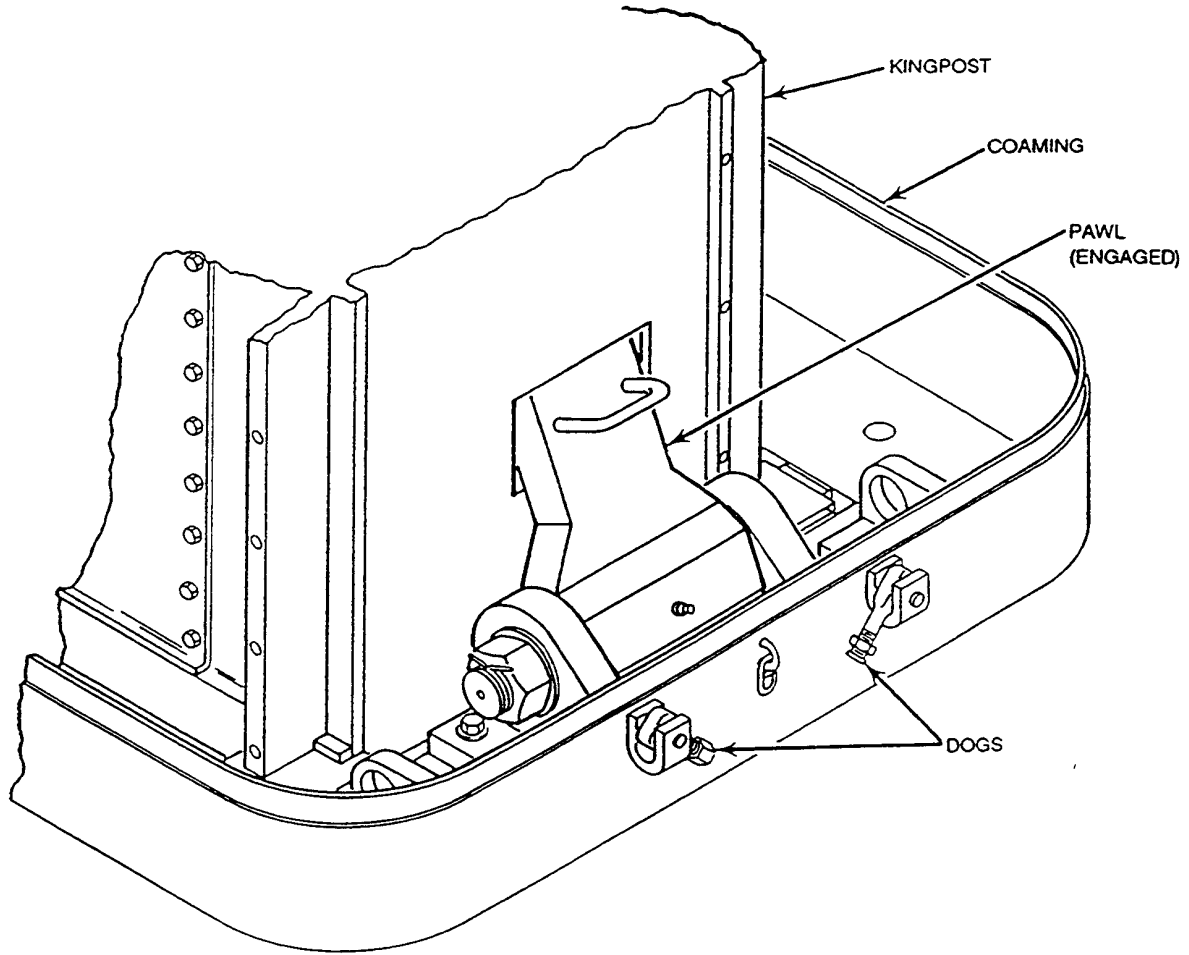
Pawl Assembly (Engaged, Kingpost Erect)
